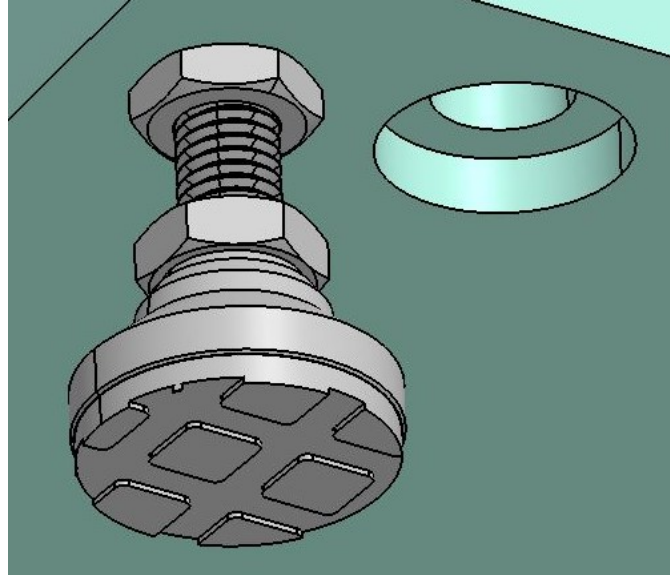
Example of a foot (left) and a machined counterbored hole for the TDM's
